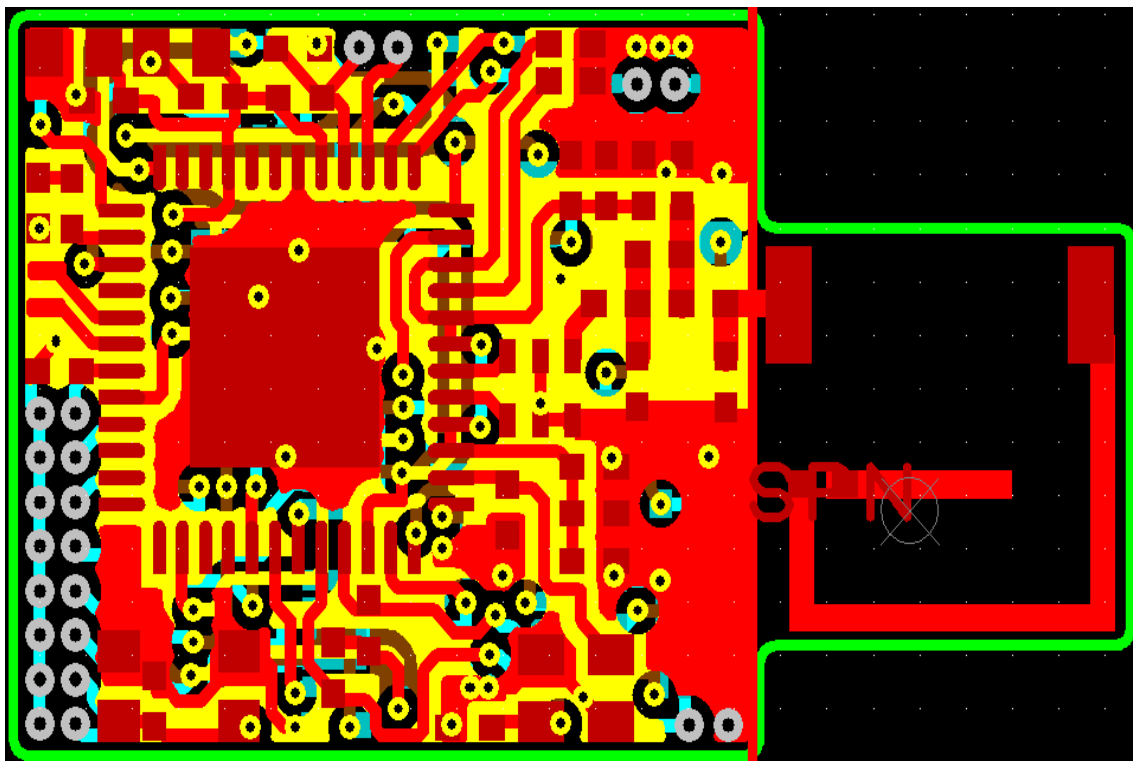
Four Layer PCB Layout of the eight channeled telemetry unit of dimension 24 mm x 13 mm
